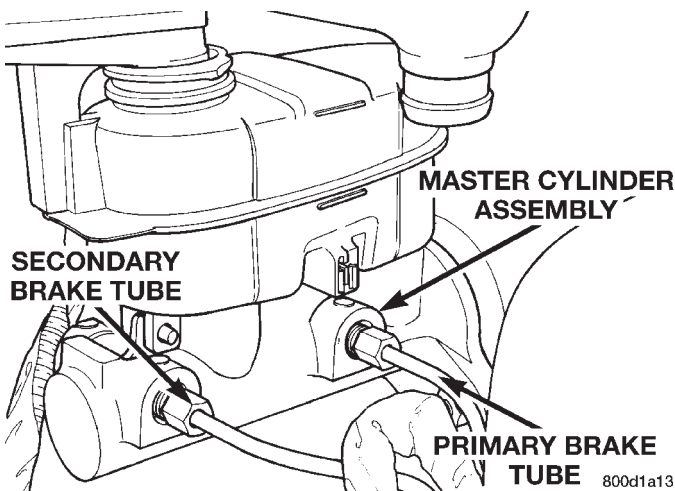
Primary/Secondary Brake Tubes At Master Cylinder
